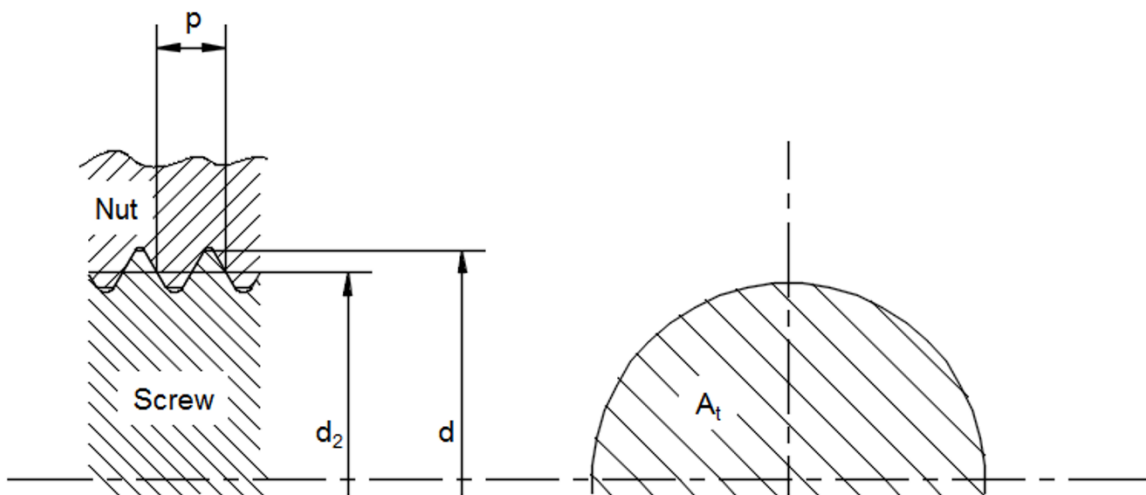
A detail of the screw and nut threads with related dimensions
